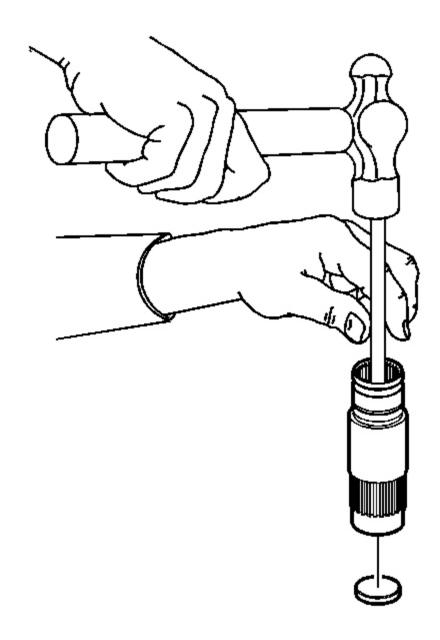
Removing Cup Plug In Front Output Shaft (If Leaking) Courtesy of GENERAL MOTORS CORP.
